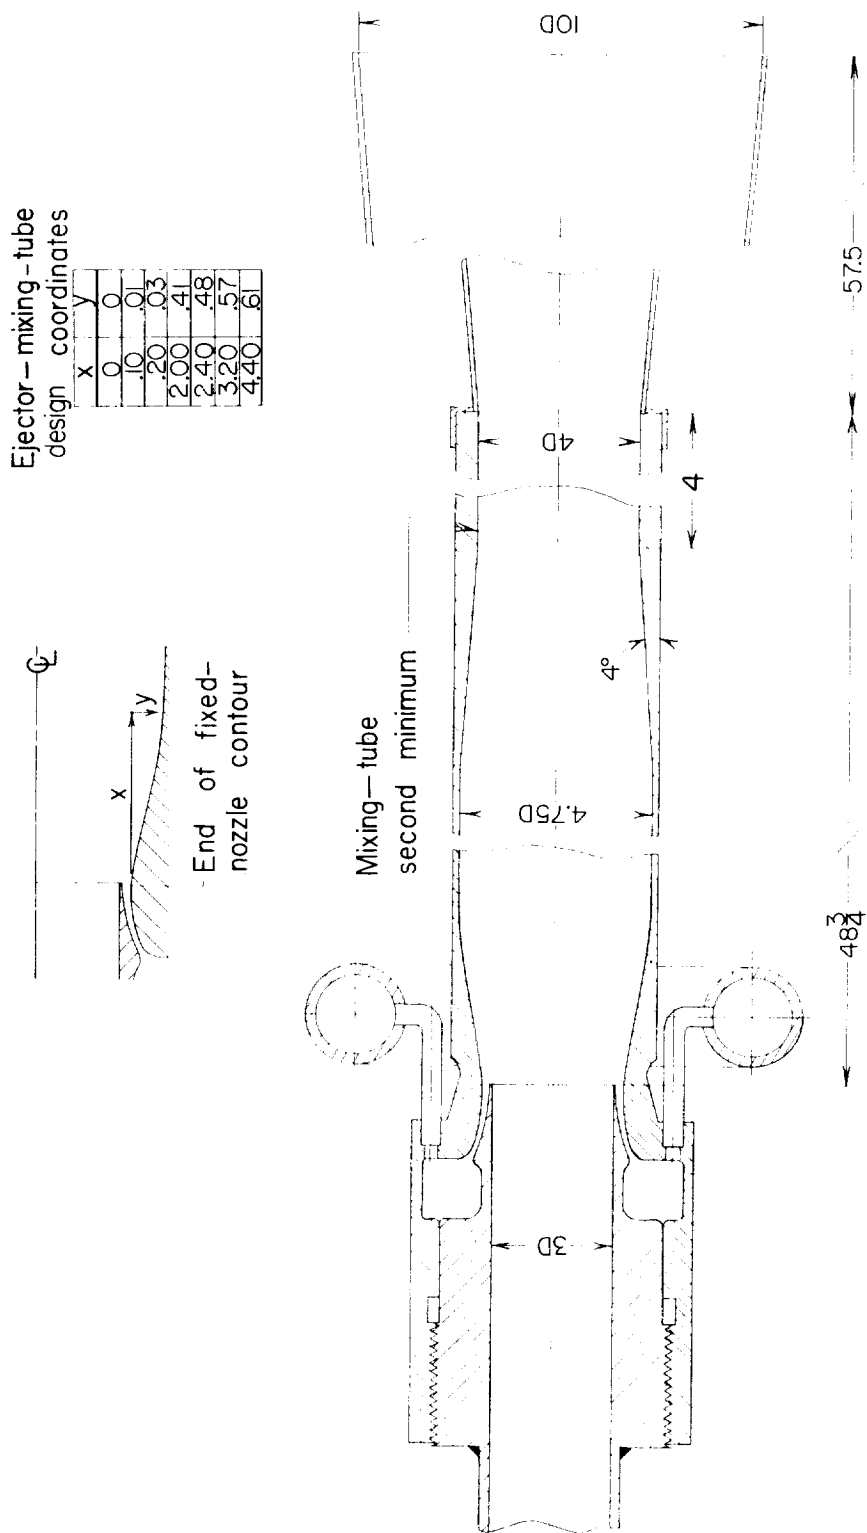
Detailed sketch showing cross section of ejector 2. All dimensions are in inches.
